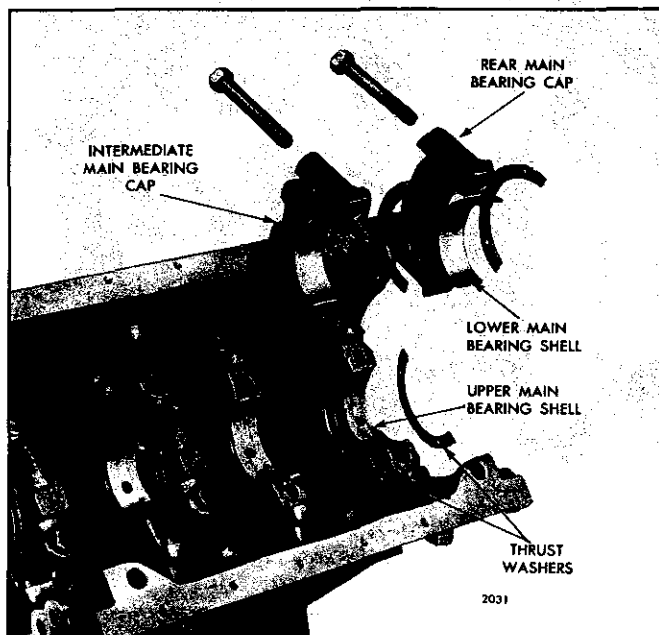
Main Bearing Shells, Bearing Caps and Crankshaft Thrust Washers — In-line Engines
